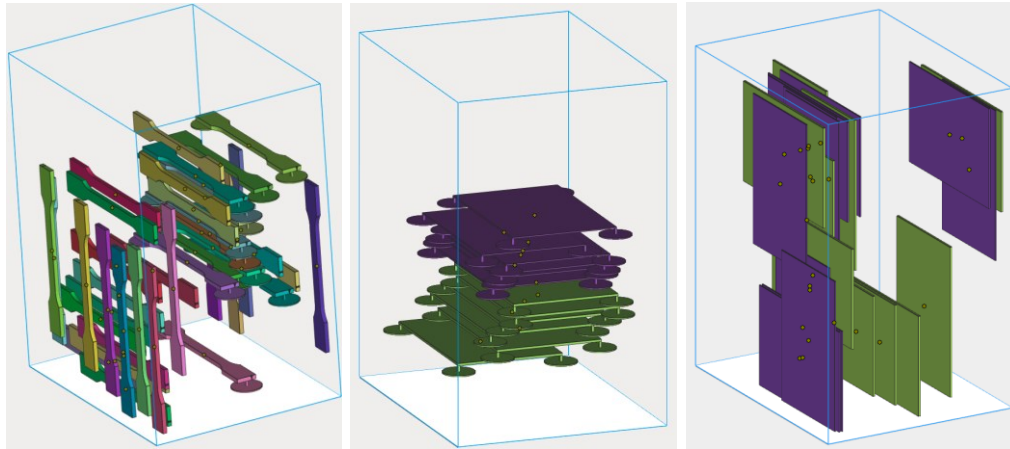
SLS nesting of specimen printing. Courtesy of Ajatec Prototyping OY.
